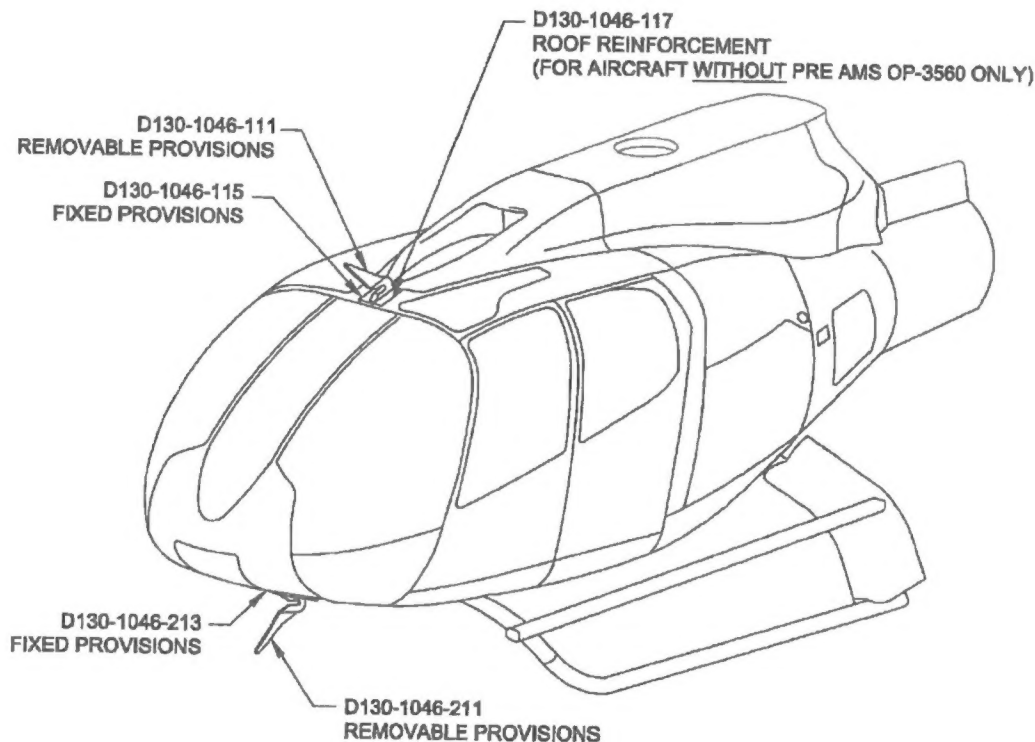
Location of D130-1046-021/-023 Cable Cutter Installation (B4 Models)
